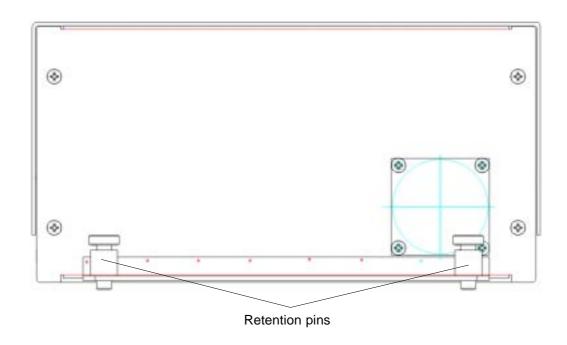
BINOS E Sheet-metal Housing , Front panel, Front view
